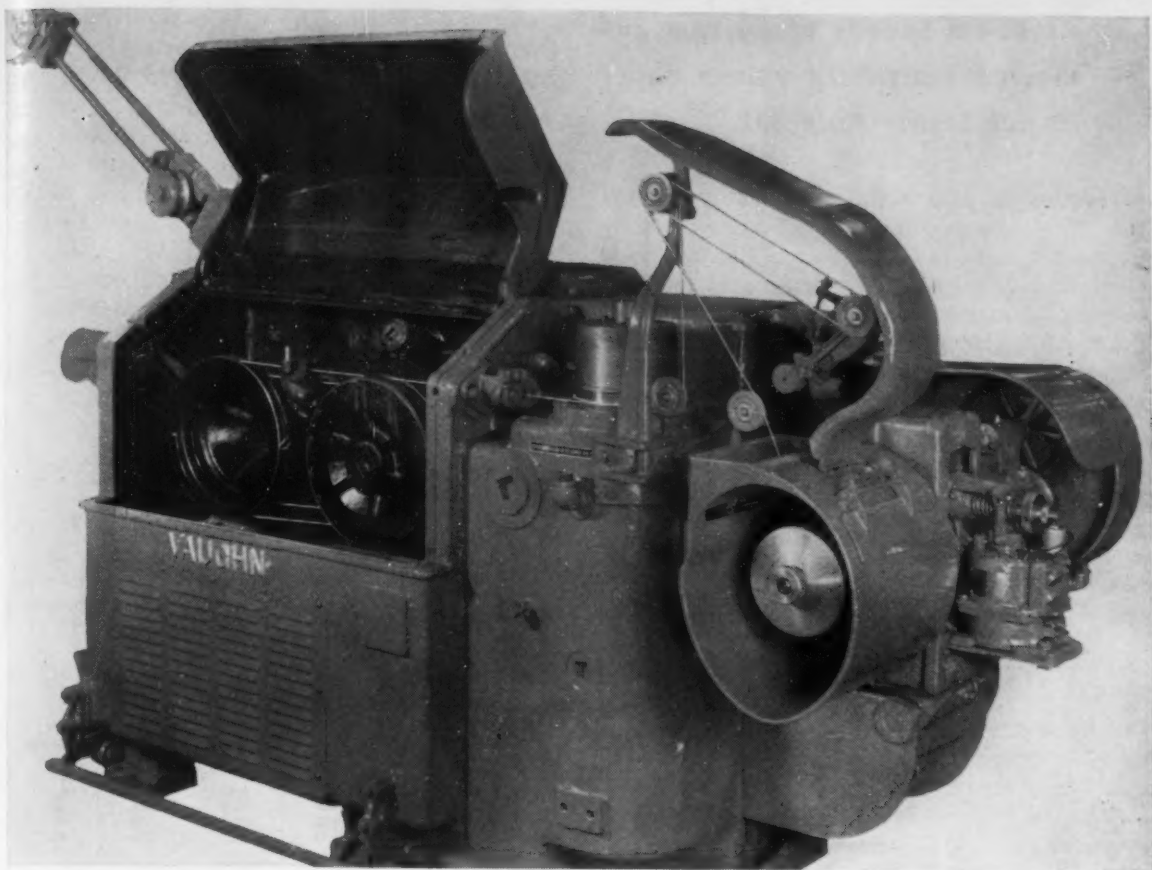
Larger wire, 0.072 in. in diam, was annealed at 2100°F then run through this Vaughn drawing unit.
